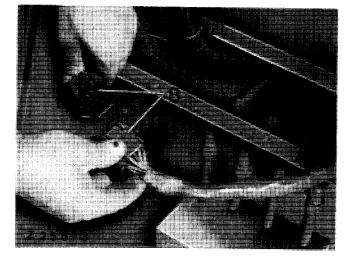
Wiring Harness Plug next to Operator's Seat (Seat Removed)
